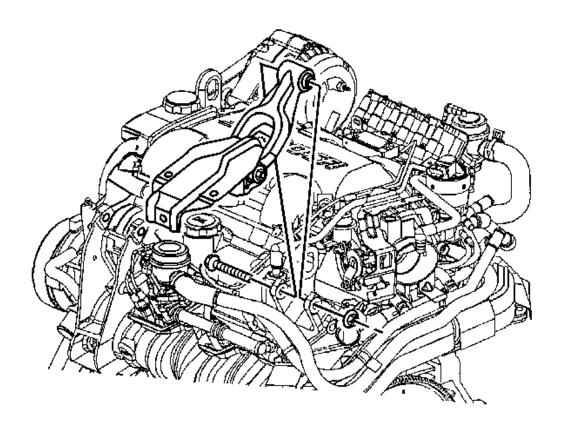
Installing Engine Mount Strut Bolt & Nut - Left Courtesy of GENERAL MOTORS CORP.
